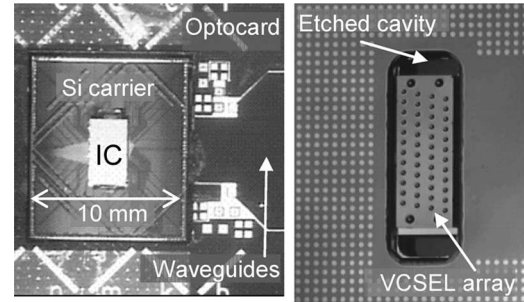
Optochip-on-Optocard assembly (*left*). Bottom view of the silicon carrier with 4×12 VCSEL-array (*right*).
